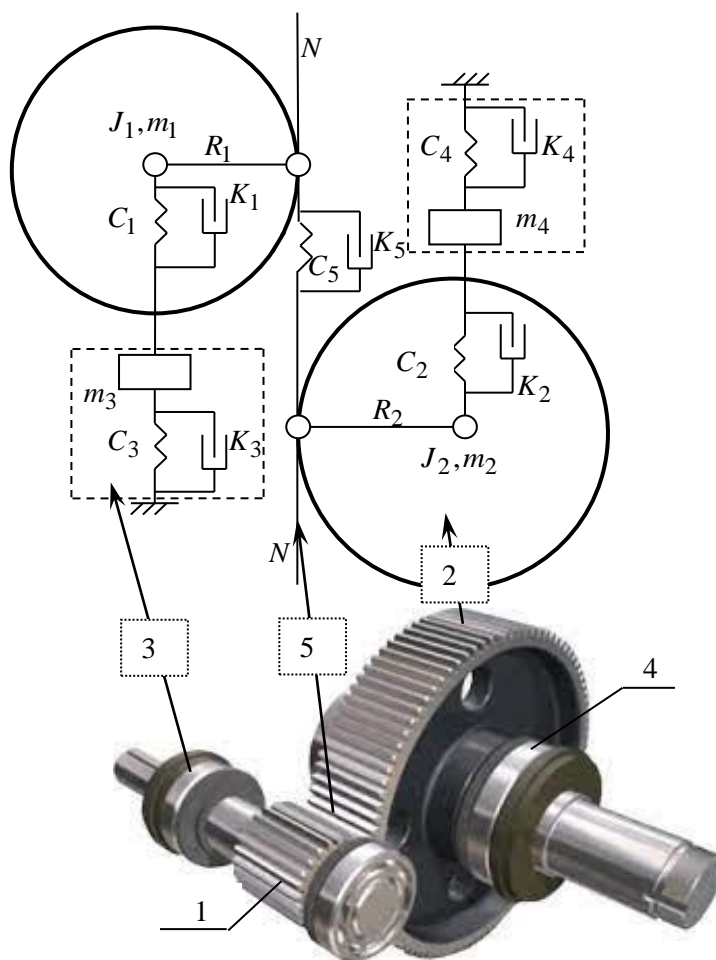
Dynamic model of a gear transmission: 1 — pinion; 2 — gear wheel; 3 — bearing of the high-speed shaft; 4 — bearing of the low-speed shaft; 5 — gear meshing zone;  $J_1, J_2$  — moments of inertia of the gear wheels,  $kg \cdot m^2$ ;  $m_1, m_2$  — masses of the gear wheels,  $kg$ ;  $R_1, R_2$  — radii of the base circles of the gear wheels,  $m$ ;  $m_3, m_4$  — masses of the rolling bearings,  $kg$ ;  $C_1, C_2$  — stiffnesses of the gear wheels,  $H/m$ ;  $C_3, C_4$  — stiffnesses of the rolling bearings,  $H/m$ ;  $C_5$  — stiffness of gear meshing,  $H/m$ ;  $K_i$  — damping coefficients of the corresponding system elements,  $H \cdot s/m$ ;  $N-N$  — line of action
